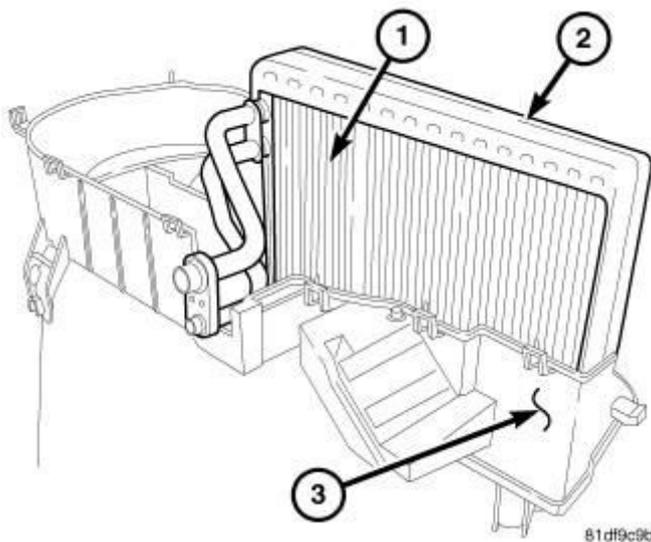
A/C Evaporator, Foam Insulator & Lower Half Of HVAC Housing
